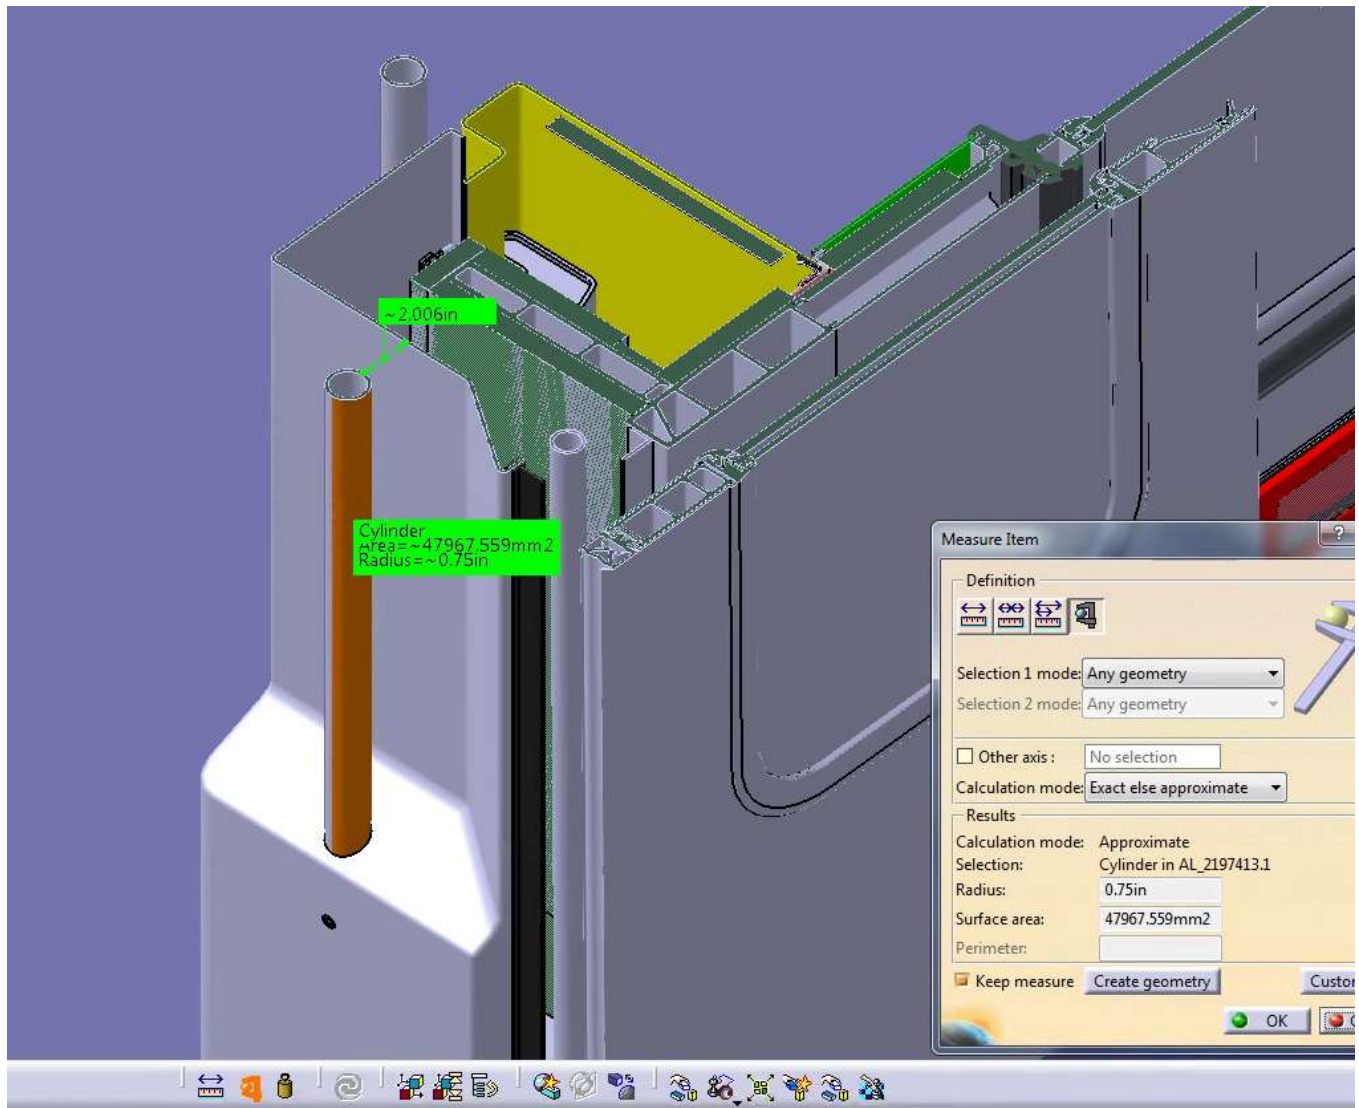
Size and Knuckle Clearance of Side Door Handhold
